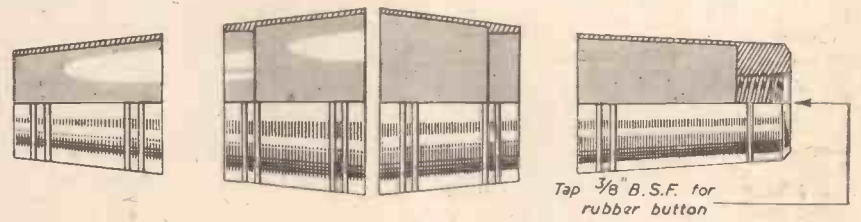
Half-sectioned collar, winch rings and butt cap, made from duralumin or tinted brass.
